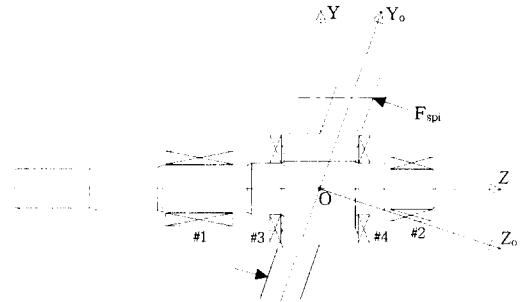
Analytical model for drive shaft on 4 roller bearings.
